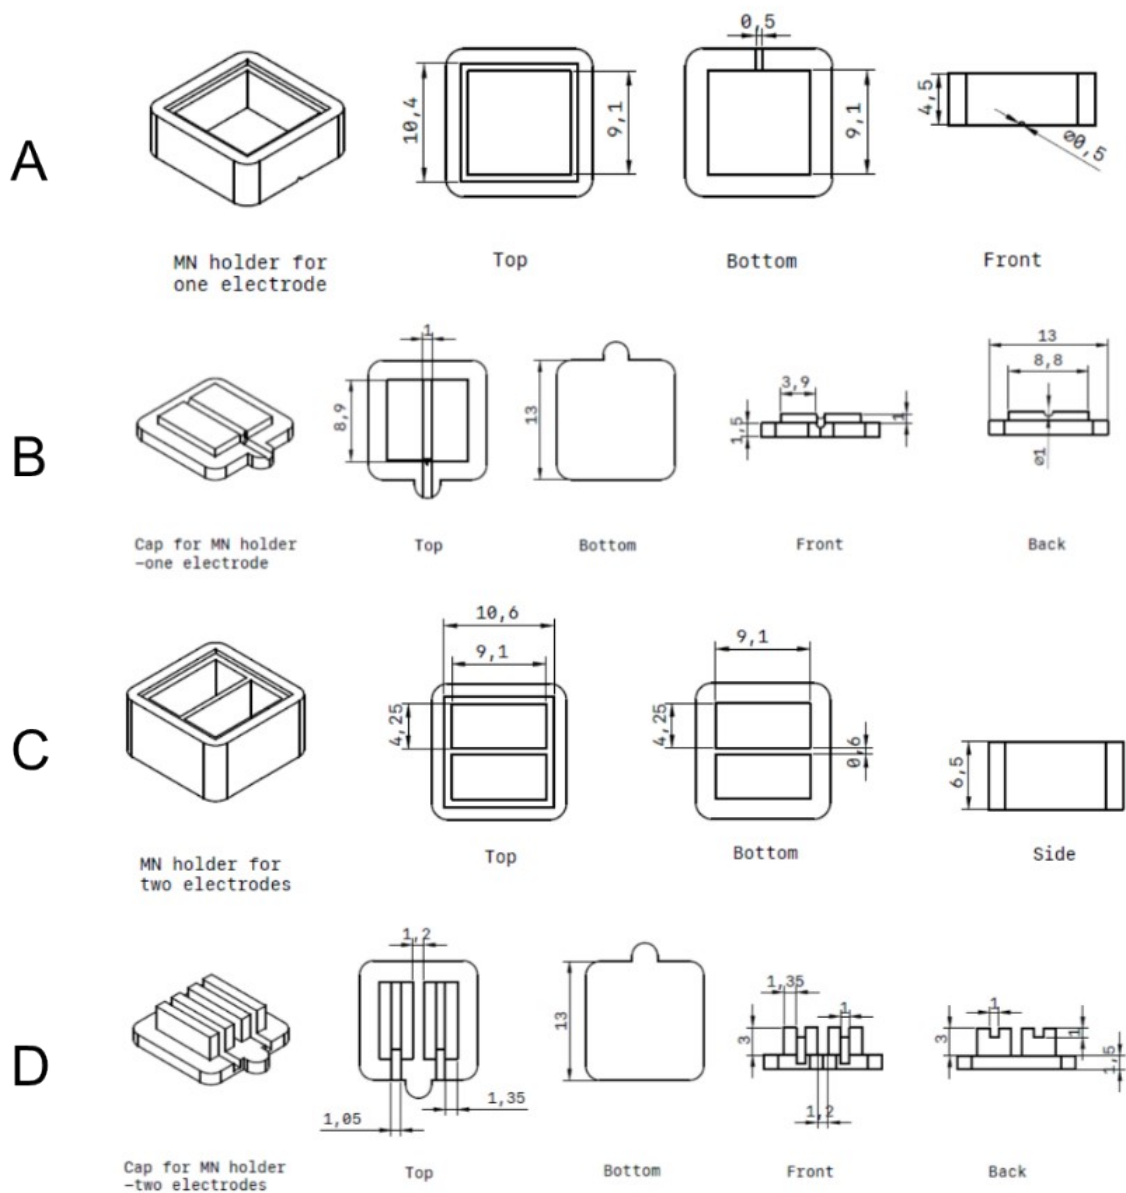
Drawing of designs at different perspectives: (A) MN holder for one electrode, (B) Cap for the MN holder for one electrode, (C) MN holder for two electrodes, and (D) Cap for the MN holder for two electrodes. The dimensions are shown in mm unit.
